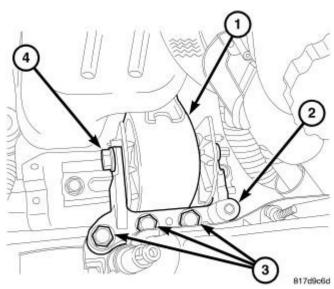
Right Engine Mount Assembly Courtesy of CHRYSLER GROUP, LLC
